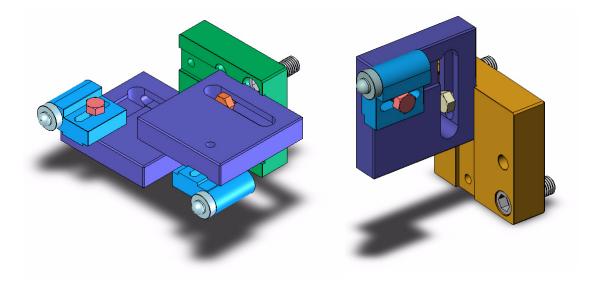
The assemblies for secondary and tertiary location for the test fixture
